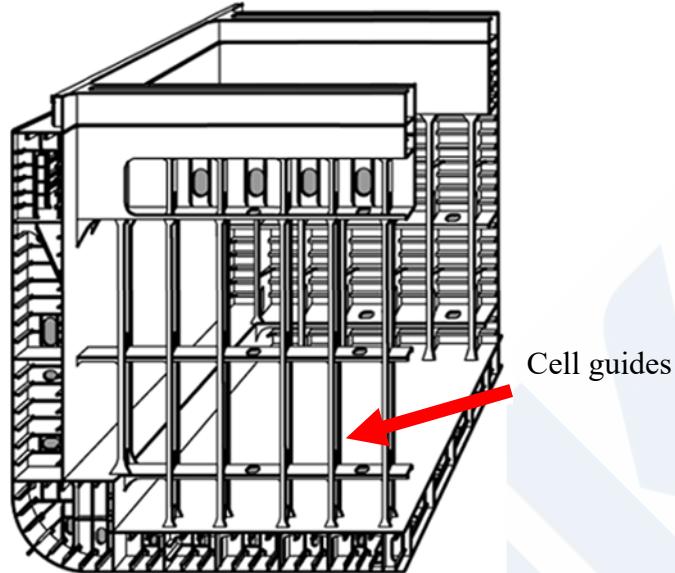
Cargo Hold Construction of Girderless Container Ships
